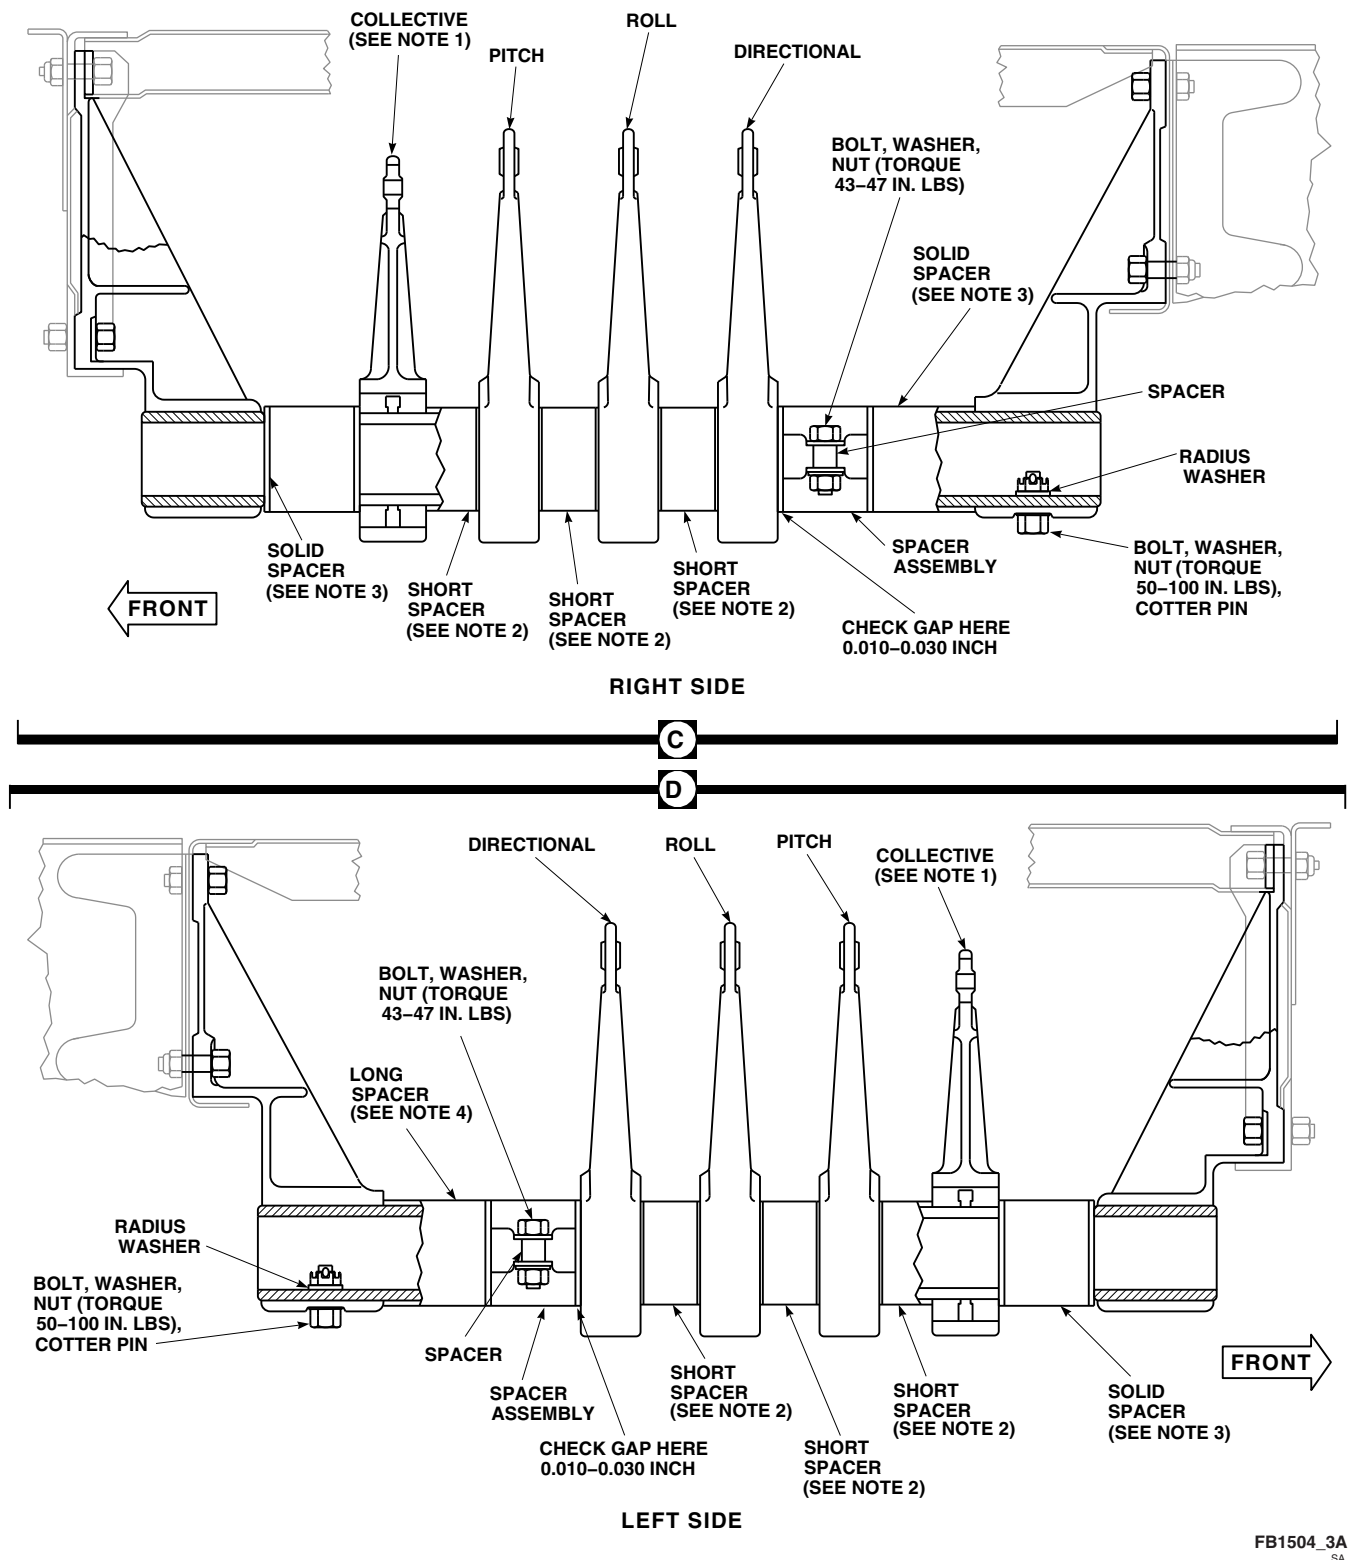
REPLACE MIDSECTION BELLCRANKS AND SHAFT (SHEET 3 OF 3)
